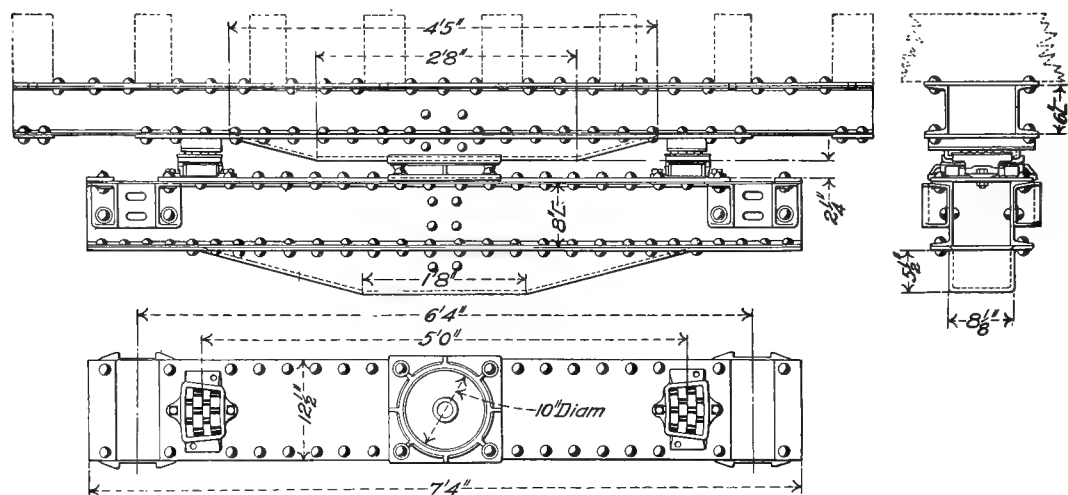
Monitor Body and Truck Bolsters with Creco Side Bearings. Chicago Railway Equipment Company.
